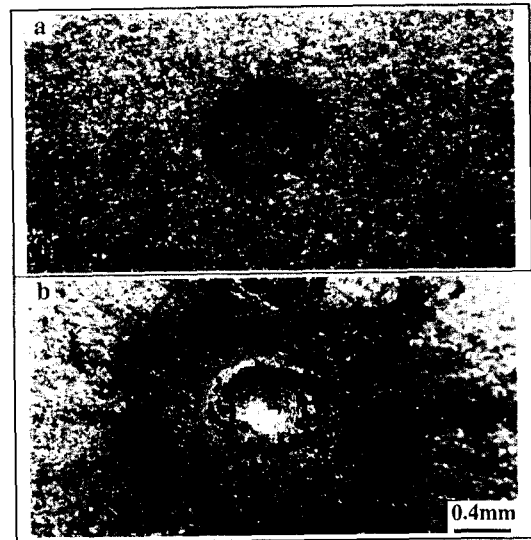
Photographs showing weld surface at optimum (a) and excessive heat input (b)
